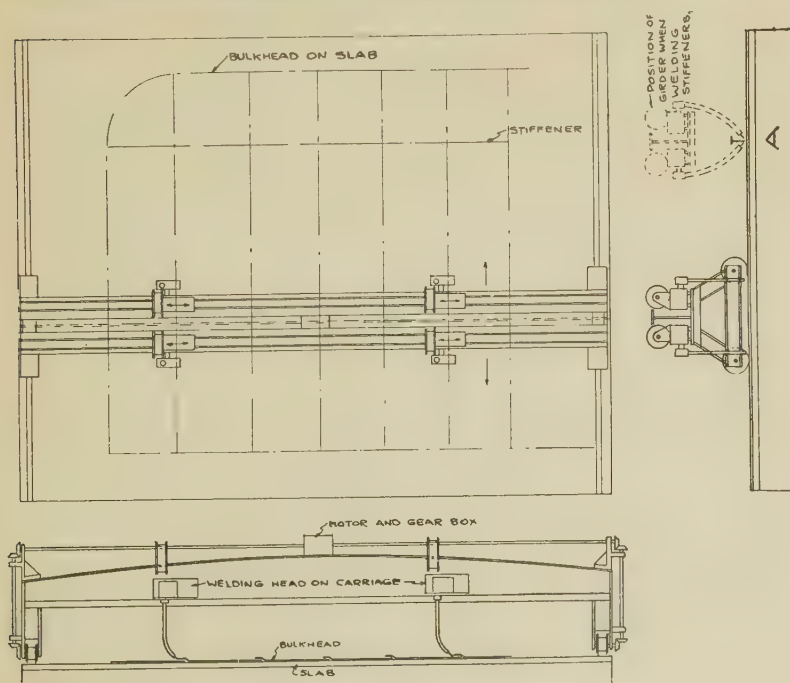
Proposed automatic metal-arc-welding machine for welding bulkheads, girders, etc.
